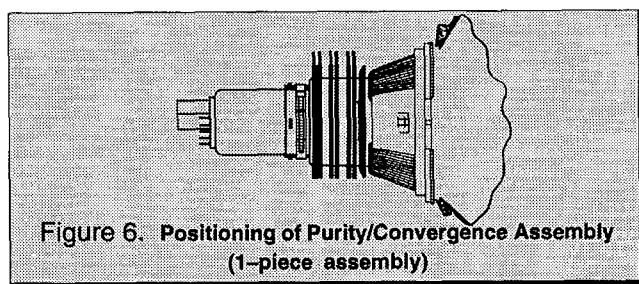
Positioning of Purity/Convergence Assembly (1-piece assembly)
